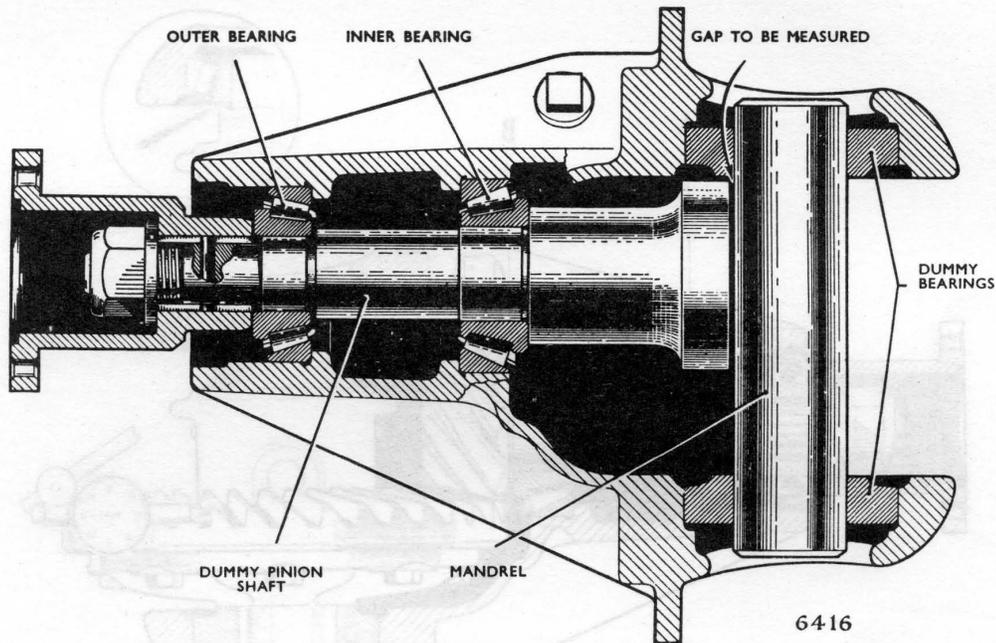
Jigs used for adjusting bevel pinion pre-load, and pinion position relative to crown wheel axis. Note also shimming positions for pinion adjustment
